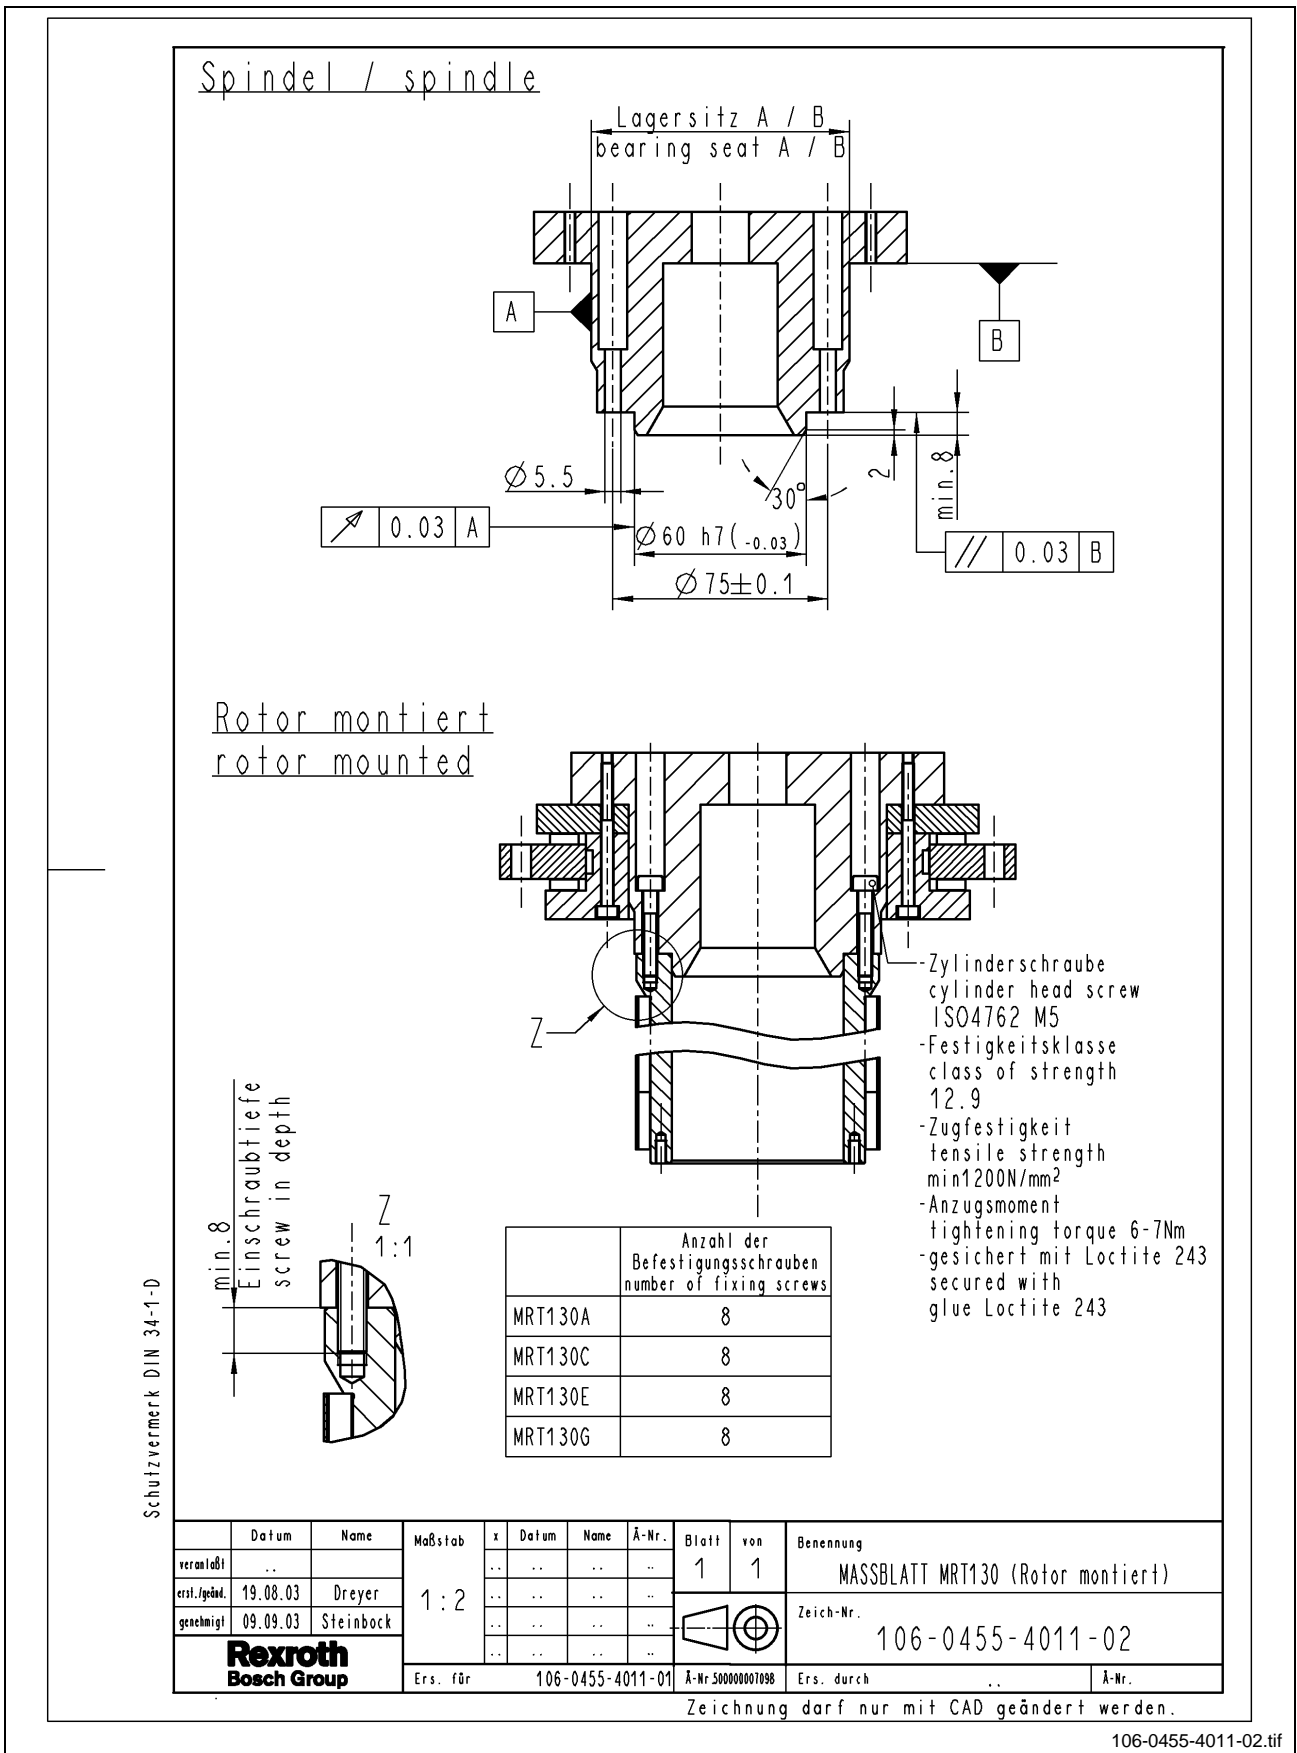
Dimension sheet Rotor MRT130, mounted
